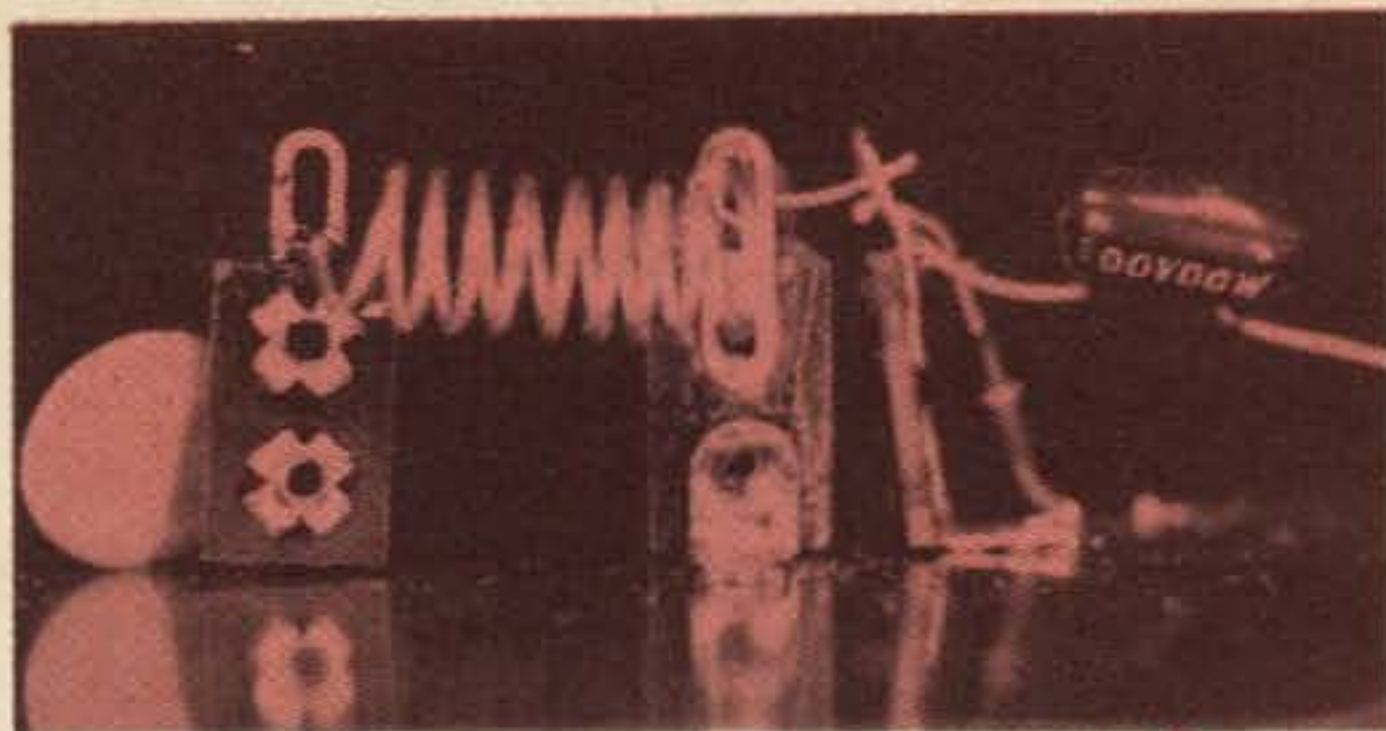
Terminal strips simplify prototyping because of the ease with which they can be soldered to a copper-clad printed circuit board. (Photo by G. Gfrerer.)
